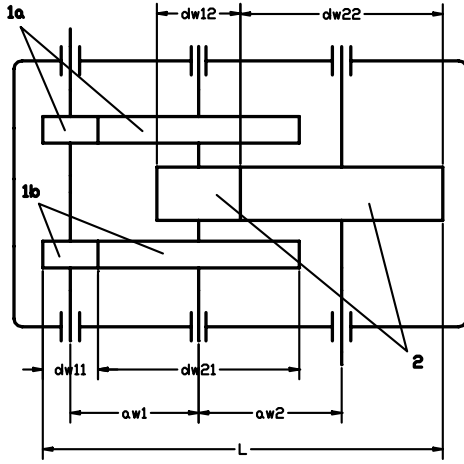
Calculating schema for helical gearbox with first-step double gear-sets
